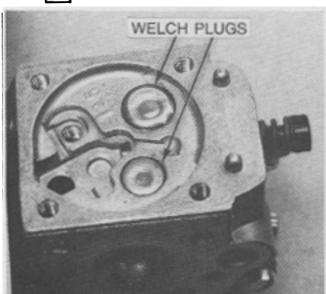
To completely clean this carburetor, it is necessary to remove both welch plugs.
